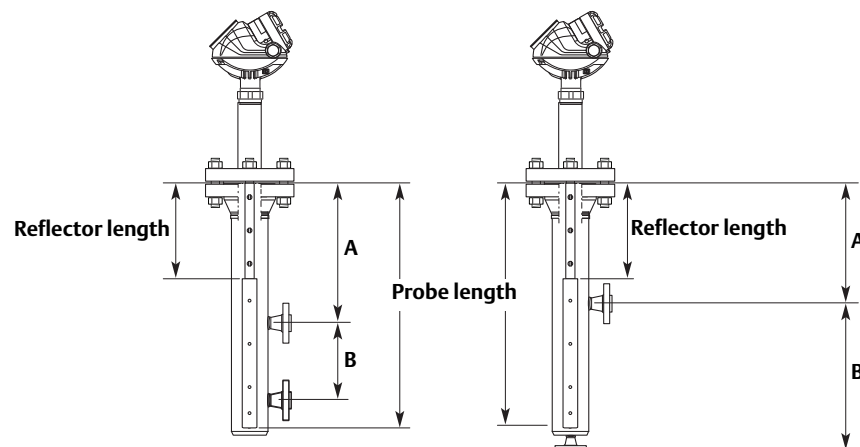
Side-and-side and side-to-bottom chambers for standard probes
